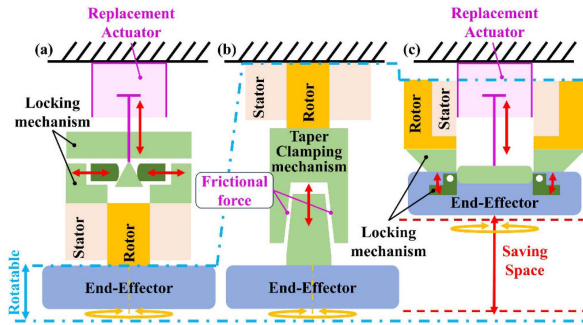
Comparison of the placement of drive-force-required replacement mechanisms: (a) Conventional tool changer used in robotic arm, (b) Conventional tool changer used in machine tools, (c) Proposed EE Lock-Spin mechanism.
